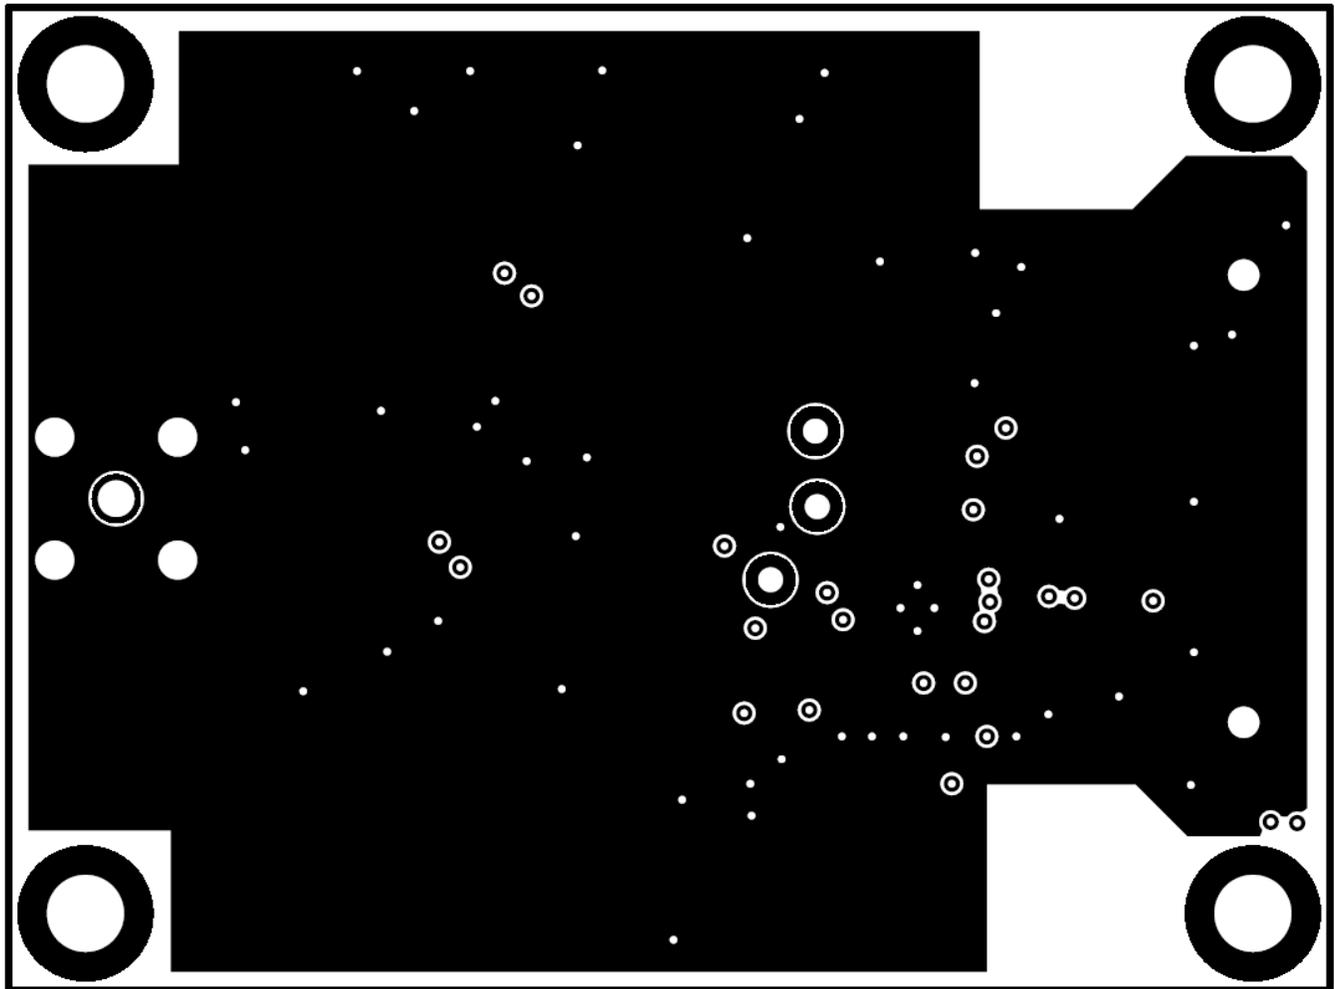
ADS7049-Q1EVM PCB Layer 2: GND Plane
